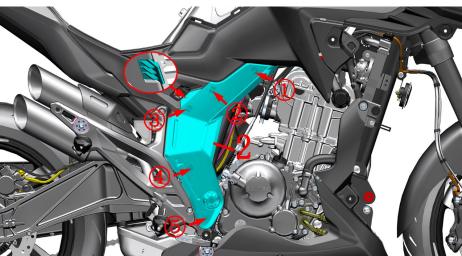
SIDE COVER COMPONENT		Lower part of the side cover	CHK	Q
